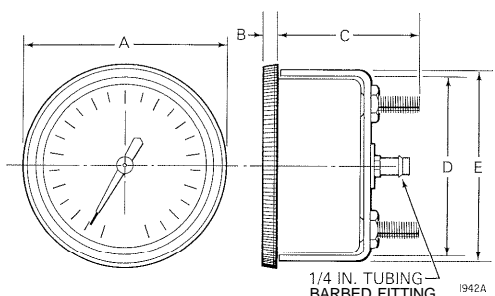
Flush-Mounted Gage Approximate Dimensions.
